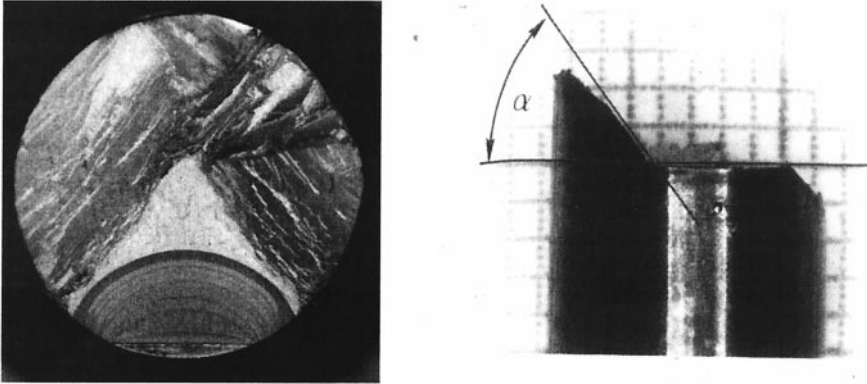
Final unstable crack path for two sharply notched [001] SC16 specimens after cyclic loading (specimen diameter: 9mm): fracture surface for a (001)[100] initial crack (left, the tensile direction [001] is normal to the fracture surface) and side view of the fracture surface for a (001)[110] initial crack showing the trace of the bifurcation plane (111) (right) [9].
